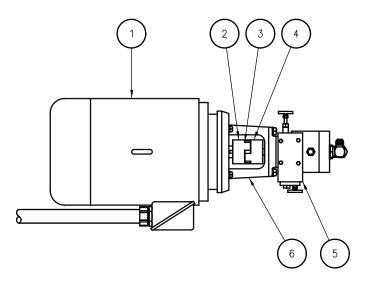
Electric Motor/Hydraulic Pump Assembly
